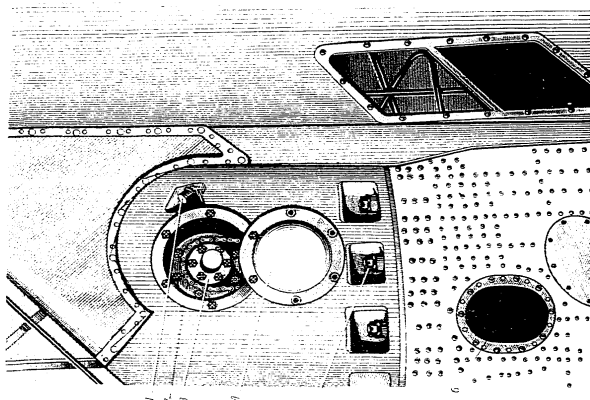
ATTACHMENT OF TAIL GEAR BOX TO FIN BEAM
